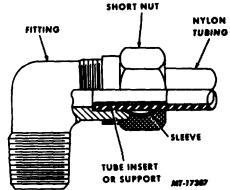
Nylon Tubing Assembly Cross Section Nylon Tubing Special Instructions
